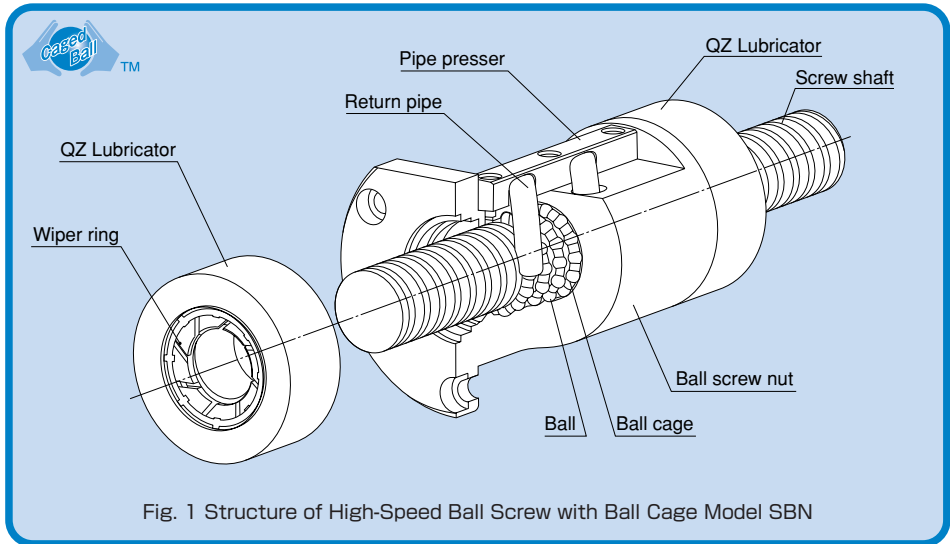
Structure of High-Speed Ball Screw with Ball Cage Model SBN
